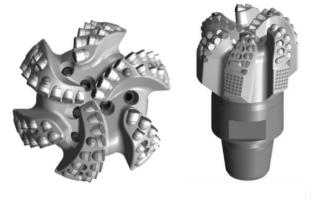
Fast 6 blades 16 mm Cutter Design for Shallower Main Zone Wells
